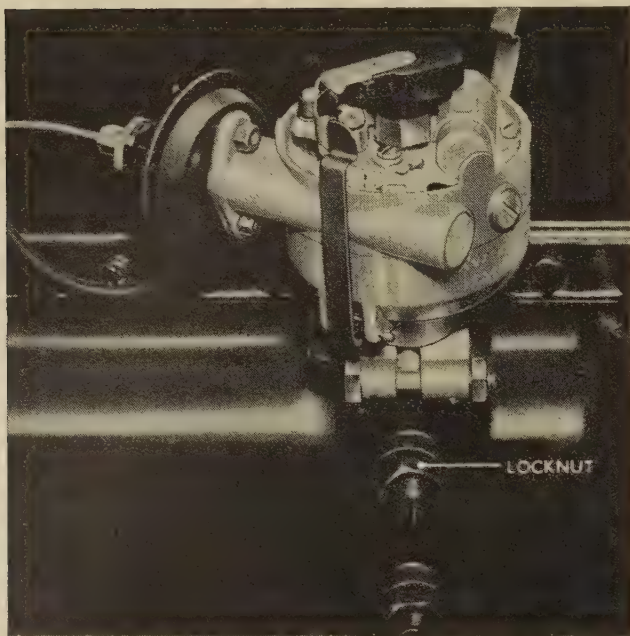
The Contact-breaker Unit Locating Screw and its Locknut (Bedford).
